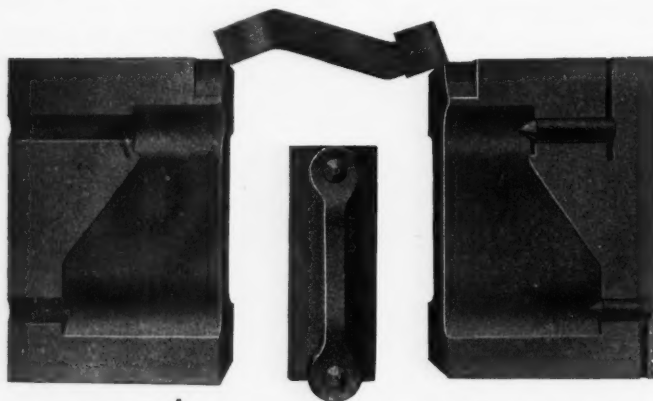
Dies and Former for Passenger Car Truck Brake Hangers.
